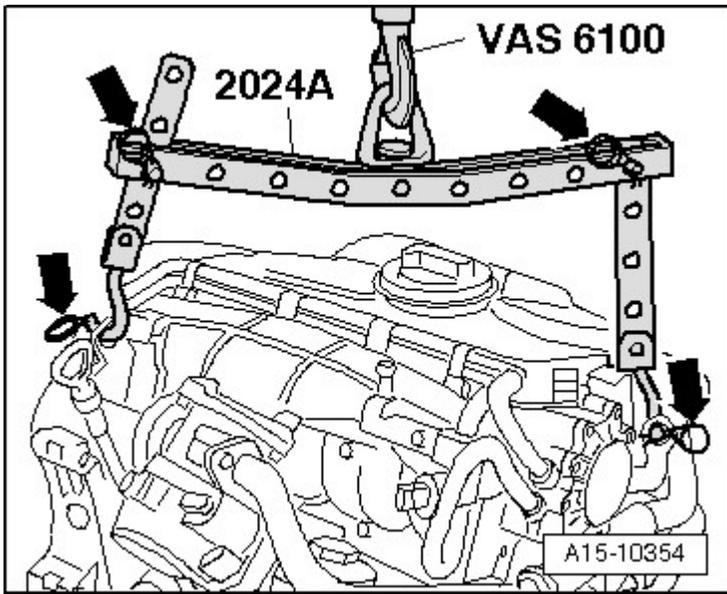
Attaching 2024 A To Cylinder Head And VAS 6100
